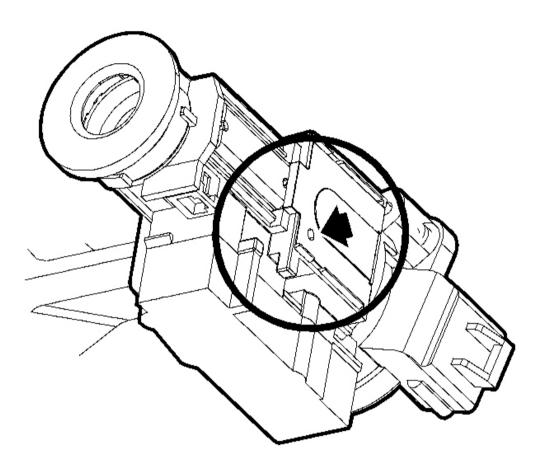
Locking Button On Side Of Ignition Module Assembly Courtesy of GENERAL MOTORS CORP.
